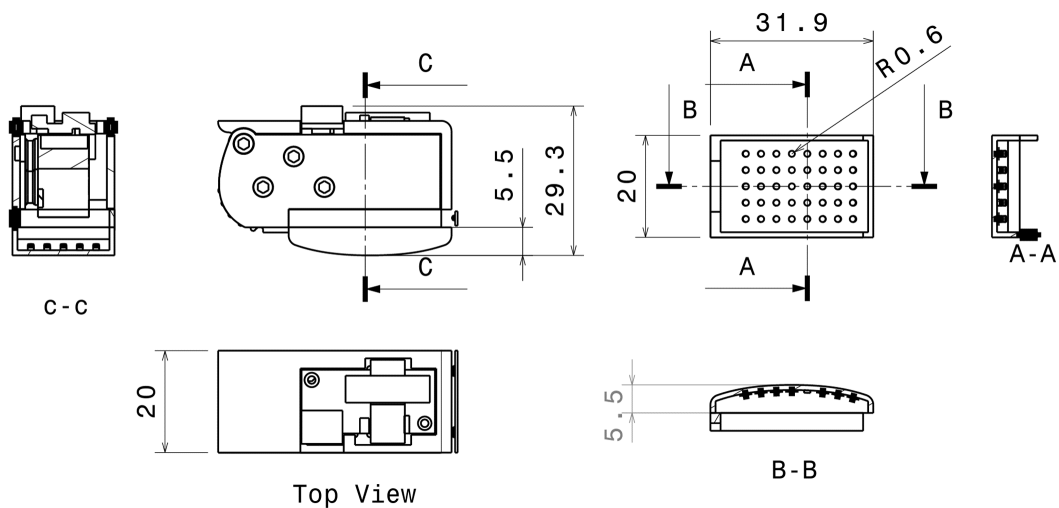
Technical drawing of the tactile fingertip showing all components and their dimensions
